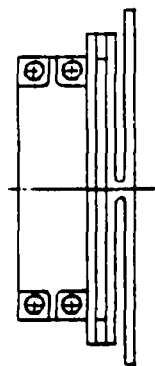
Hydrostatic Bearing Assembly for 7.00 cm dia. (7.00 in.) Shaft
